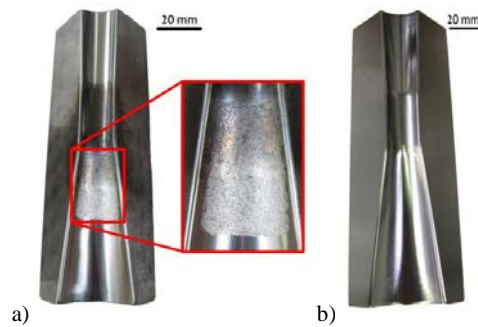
Rotary swaging tools; a) conventional tools with a tungsten carbide layer (T1), b) smooth tools (T2).
